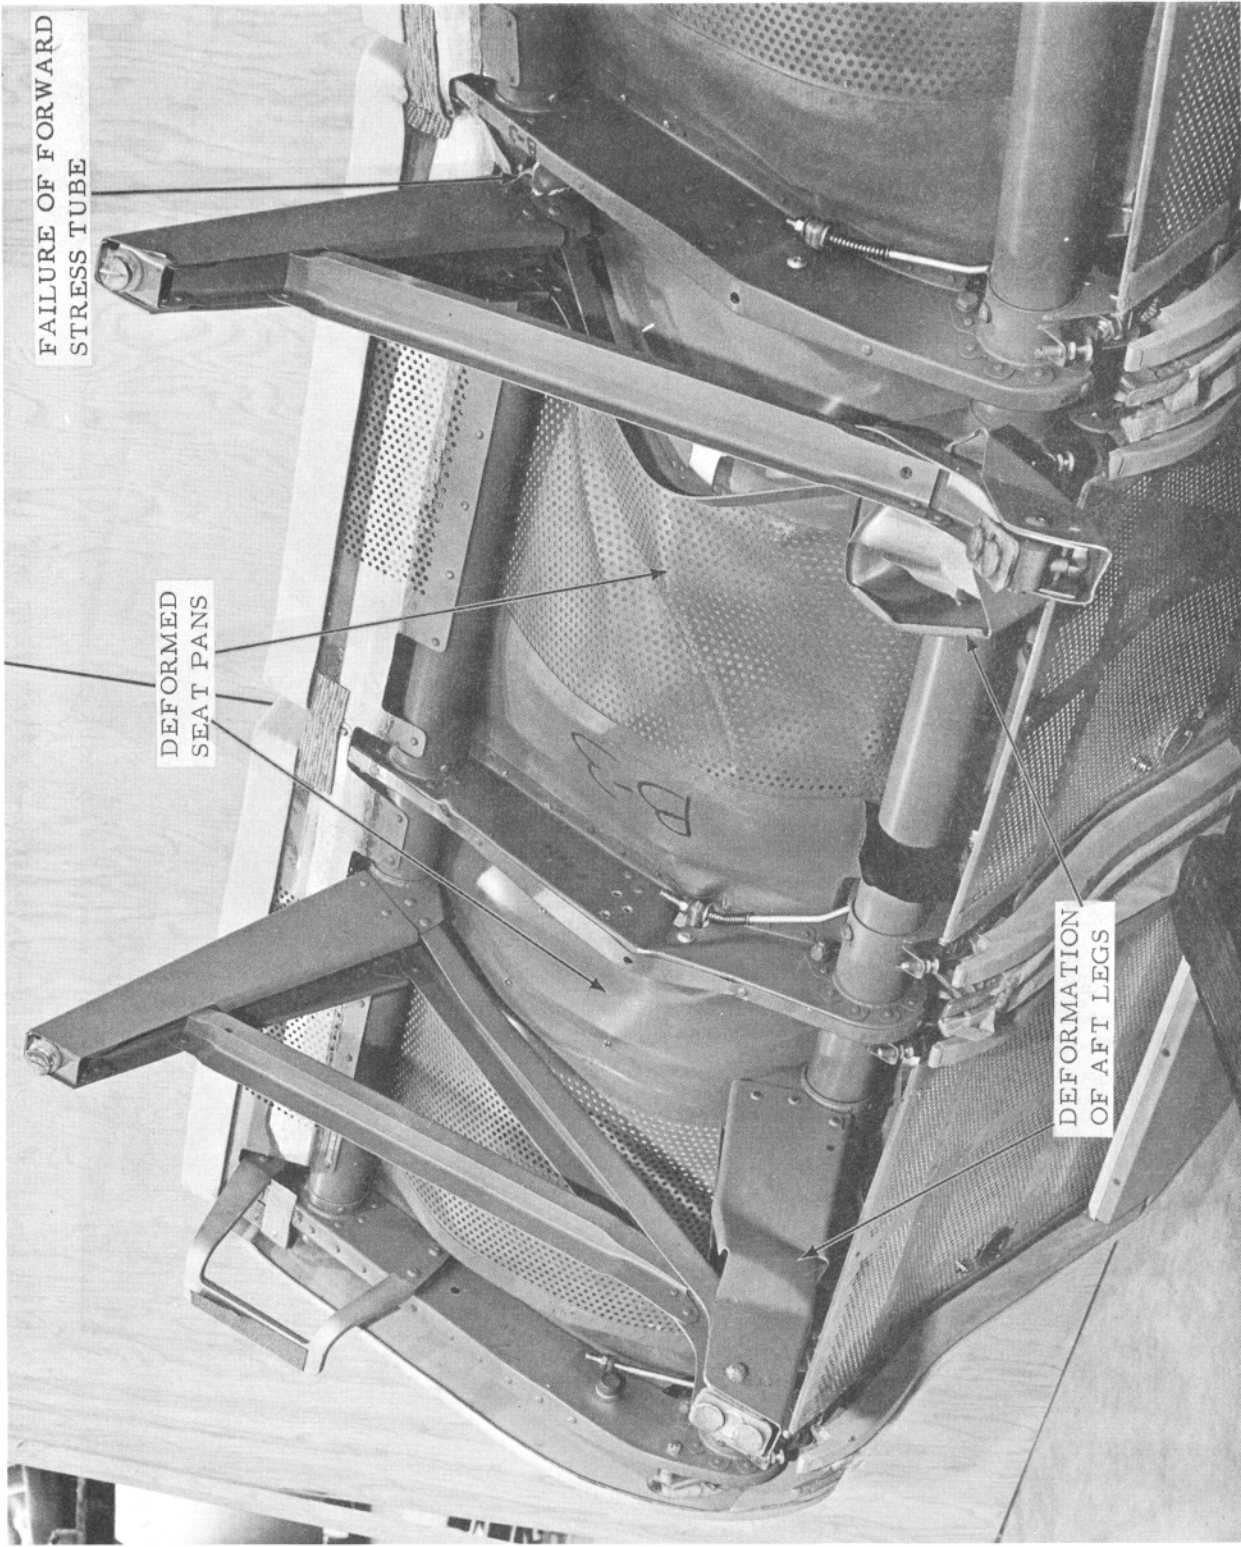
BOTTOM VIEW OF SEAT B-3 AFTER TEST NO. 70
